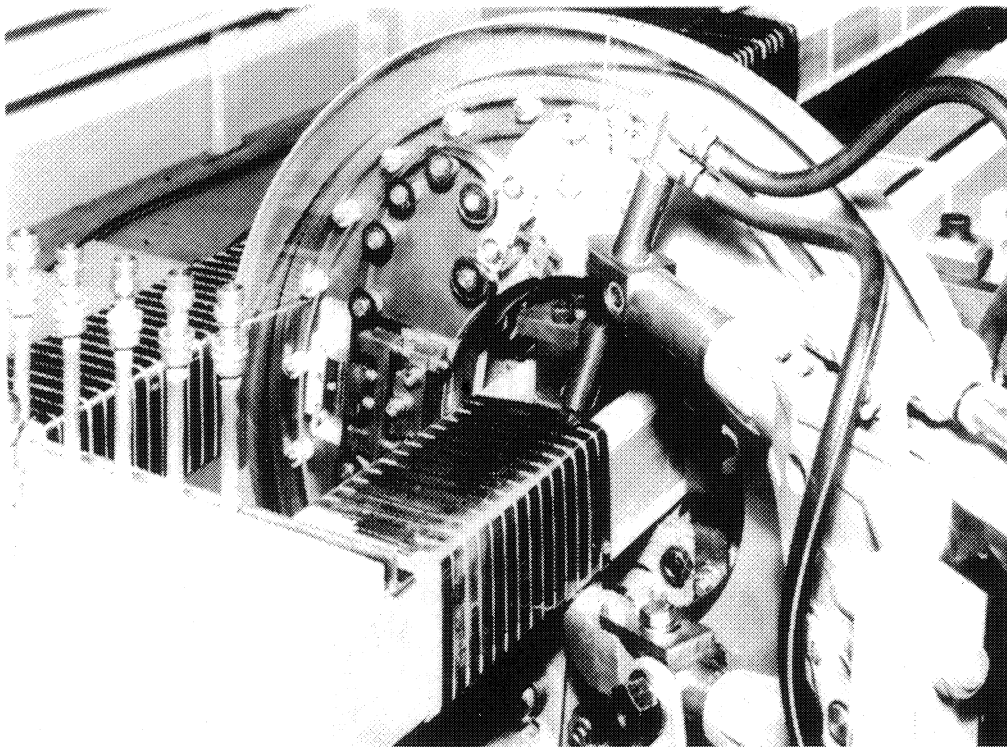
Close-up of Mark I band-wrapping machine with 2 m flat coil
